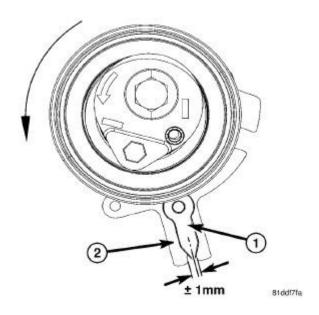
Timing Belt Tensioner Load Indicator & Gauge Courtesy of CHRYSLER LLC
